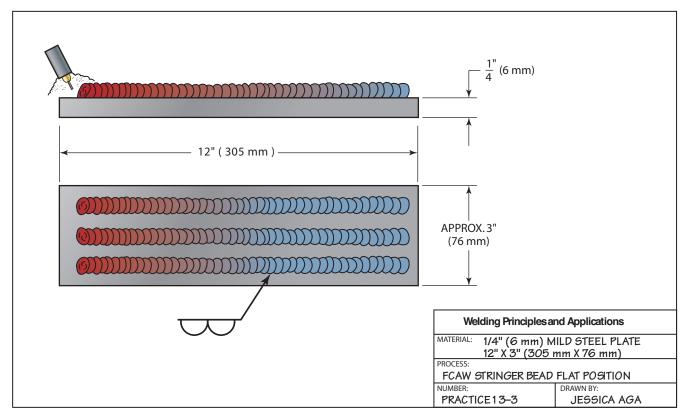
FCAW stringer bead, 1/4-in. mild steel flat position.
